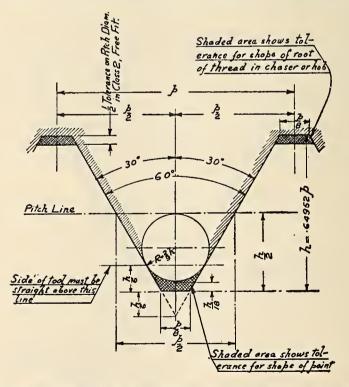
Shape for teeth of chaser or hob intended to trim crest of thread
